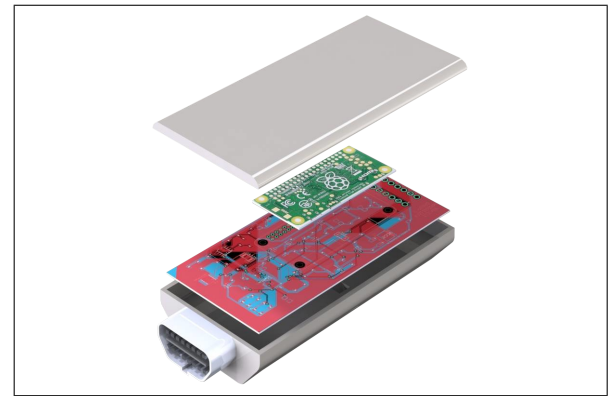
Exploded SolidWorks view of the product design, dimensions of 132 mm x 65 mm x 25 mm
